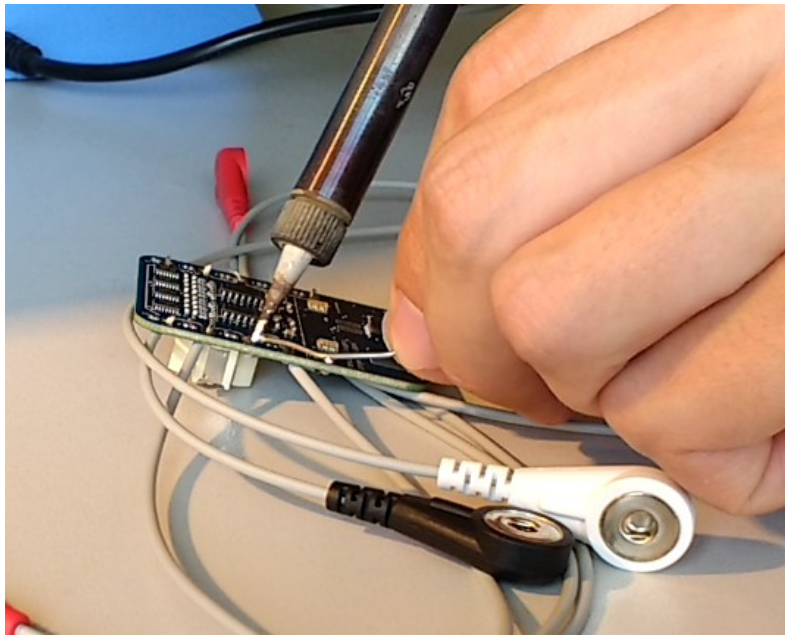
Screenshot of the video tutorial, showing how to solder the cables to the Traumschreiber board.
